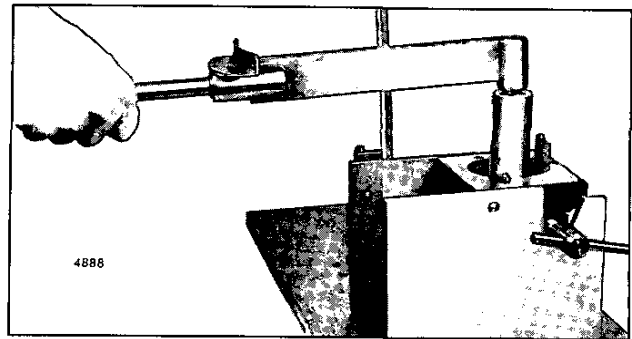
Tightening Injector Nut with Torque Wrench Using Tool J 4983-01
